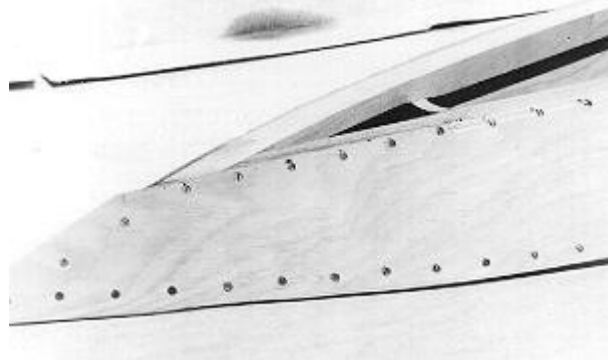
After the side planking is fastened in place, the overhanging edges may be trimmed to receive the bottom planking. Final finishing of the fairing in the aft section is best done with a 12" long minimum block with san.
